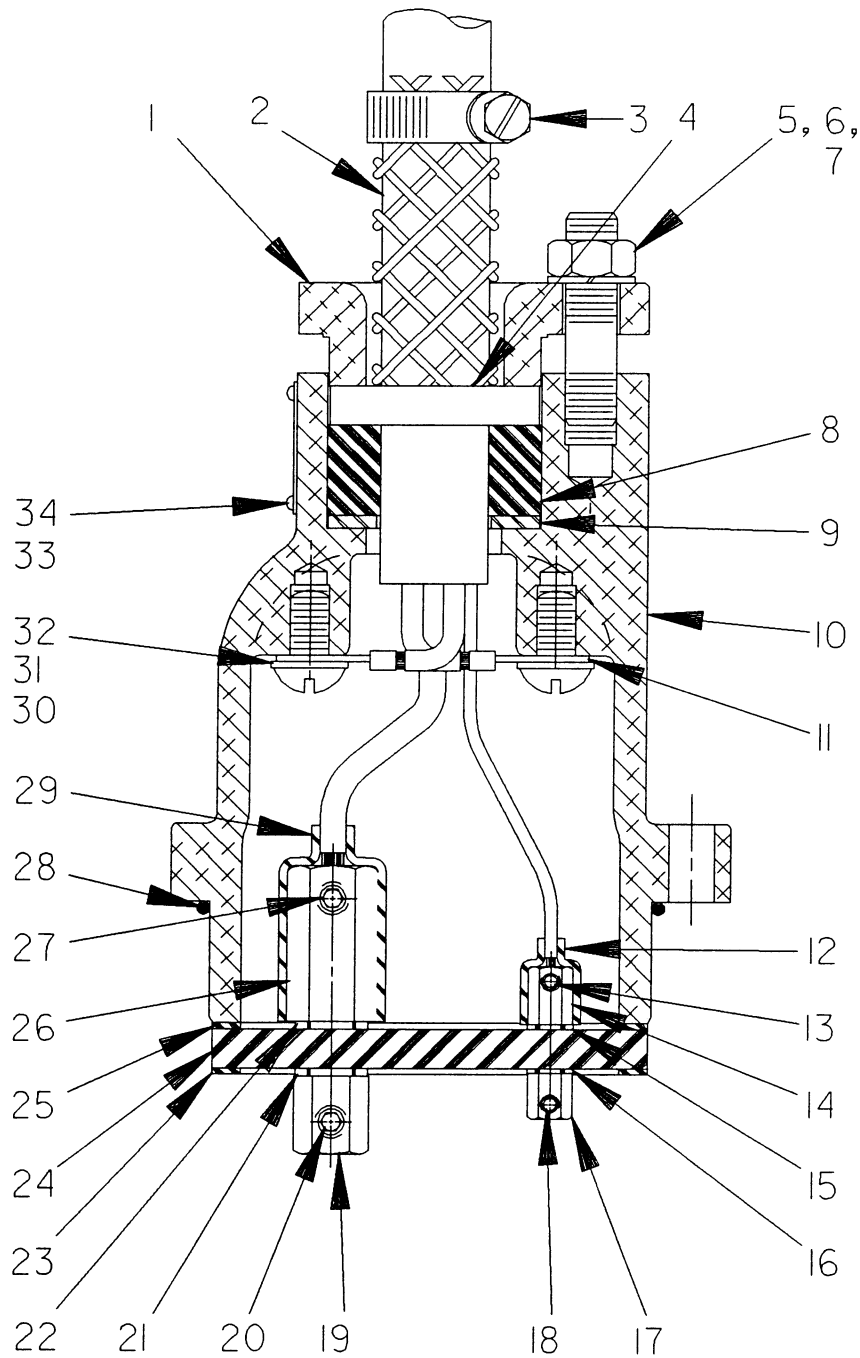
47367-075 Terminal Housing And Cable Assembly
